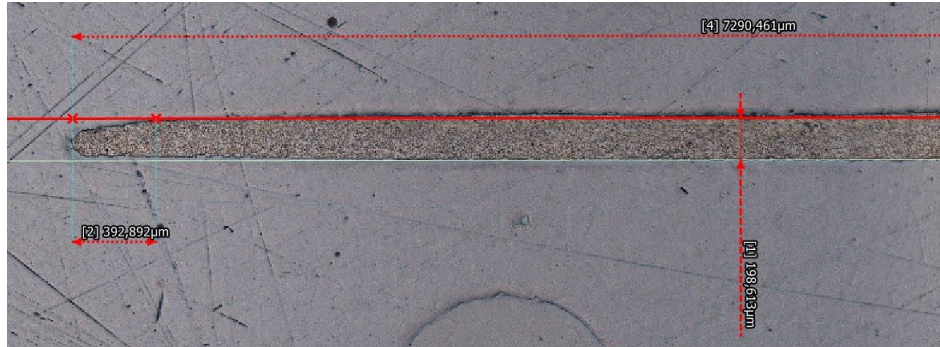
Tape edge measurement using the microscope 2D measurement tool.
